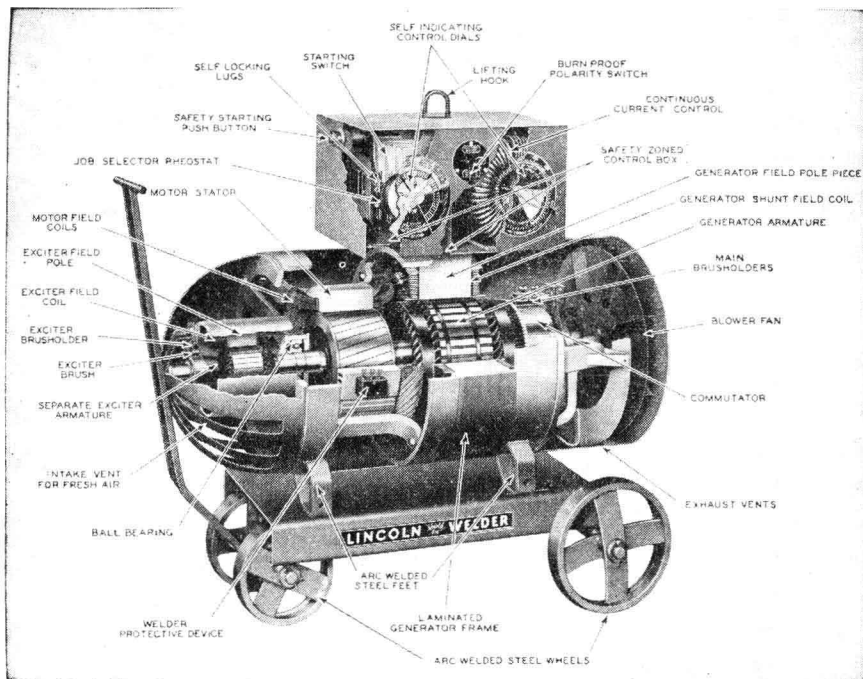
Cut-away view of “Shield-Arc” S.A.E. Welder
